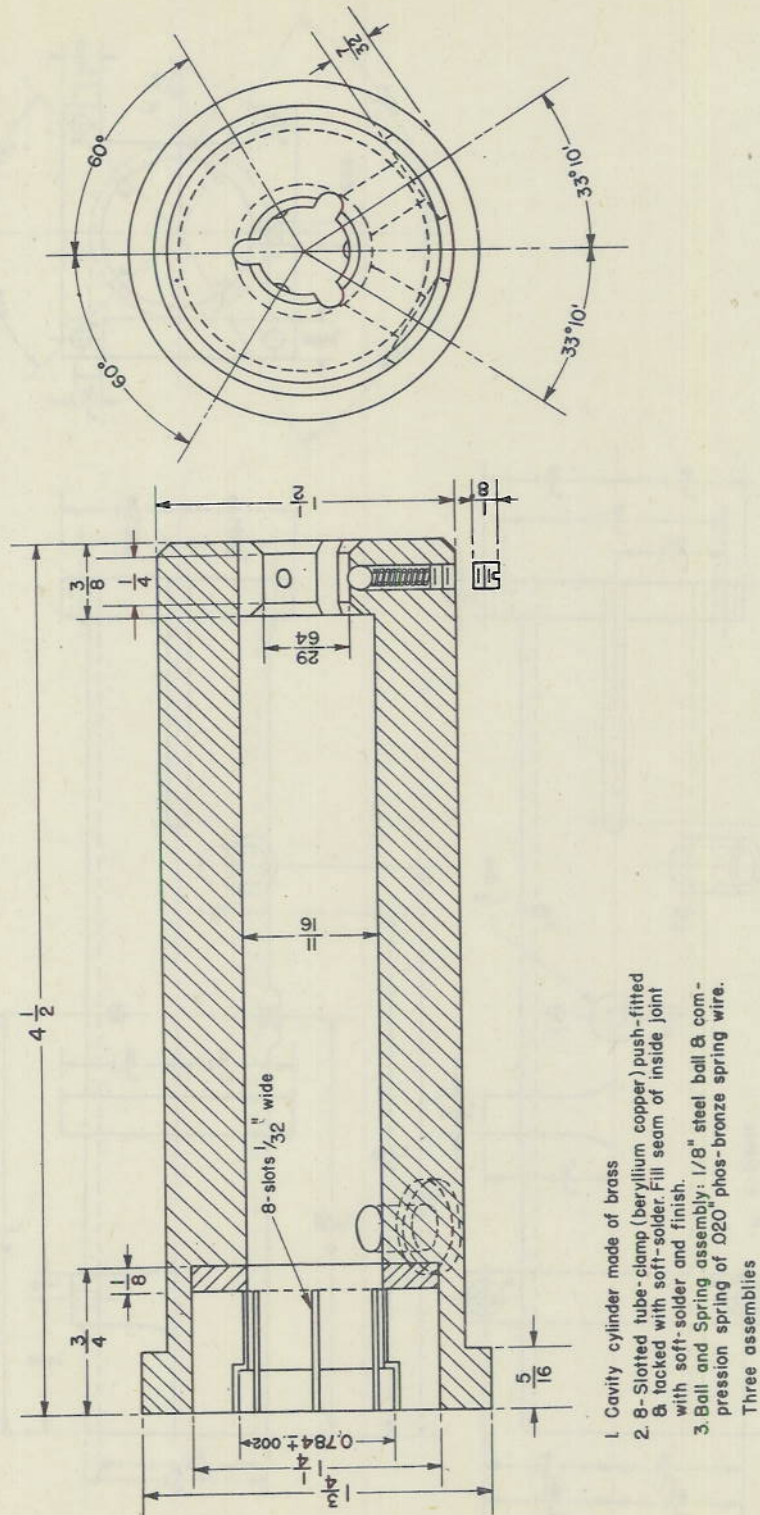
TS-622 replacement sleeve insert for use with TS-621 oscillator section
